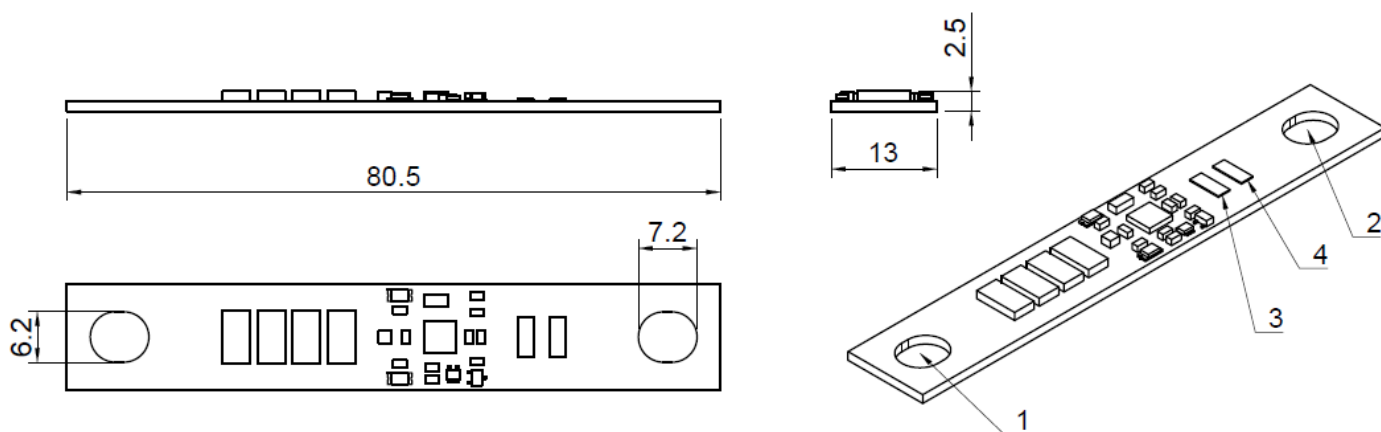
EMUS G1 Cell Module CALB CAM 72Ah (CM060A) mechanical drawing. All dimensions in millimeters.
